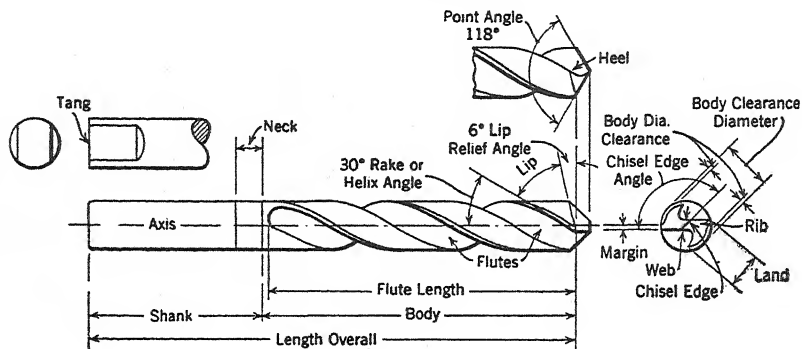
A Straight-Shank Twist Drill with Nomenclature and Angles for General Use.
